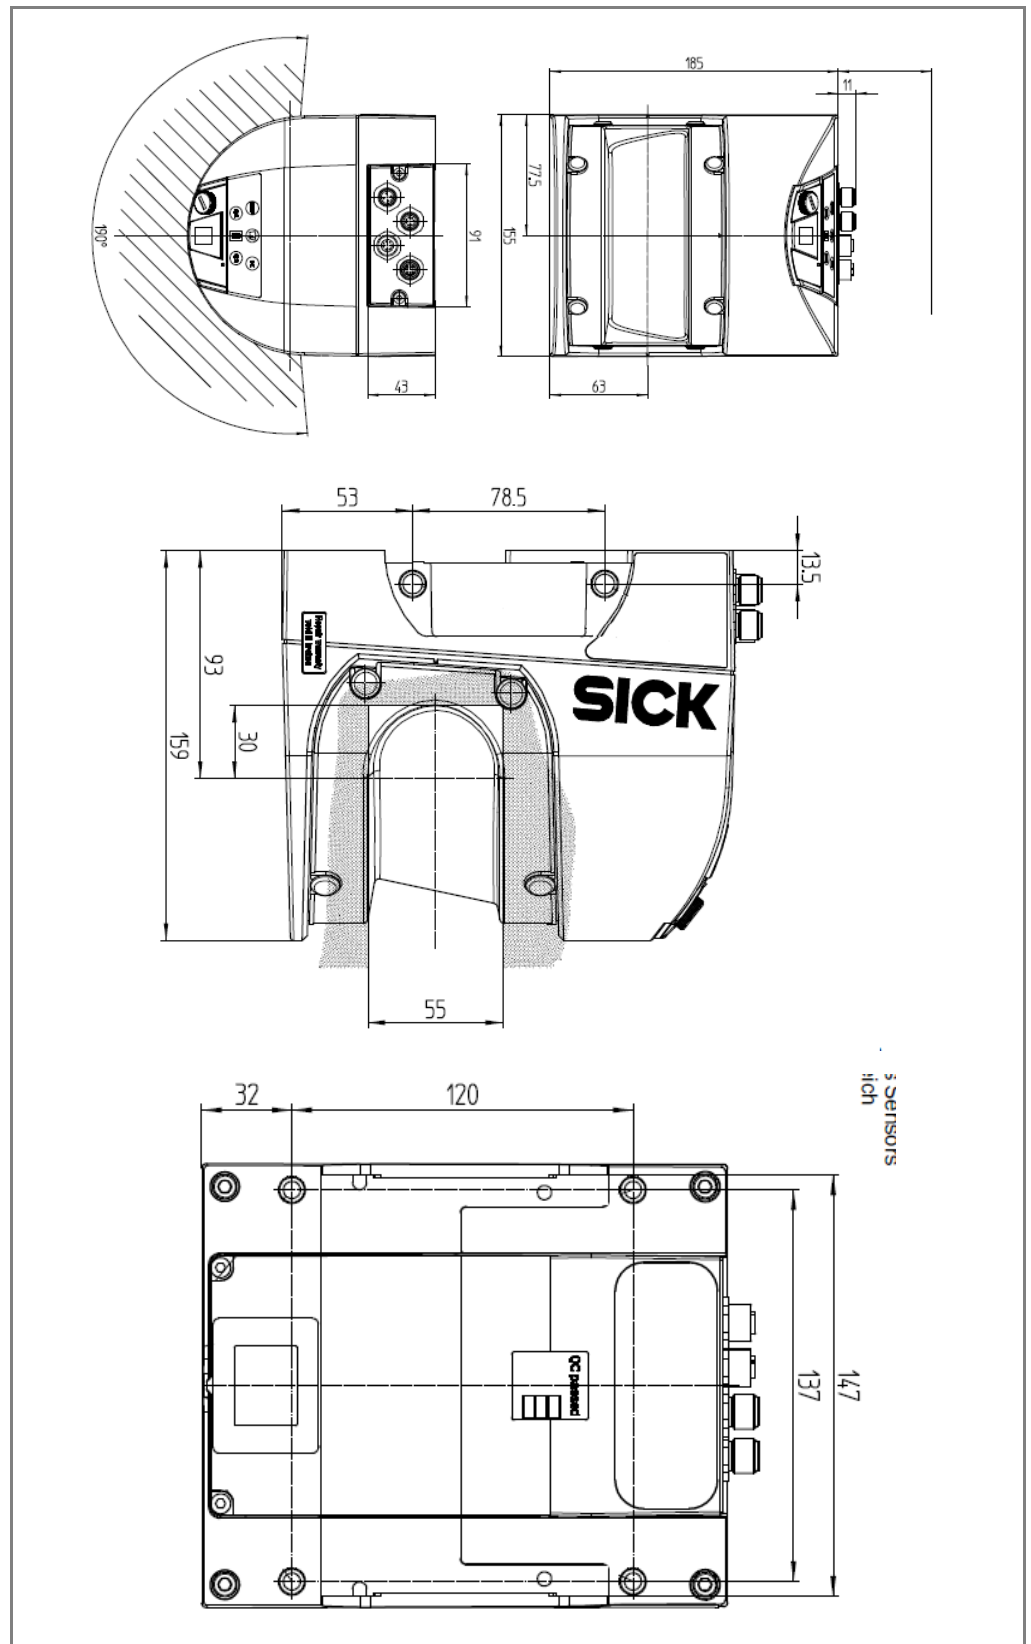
Dimensional drawings of the LMS511 laser scanner
